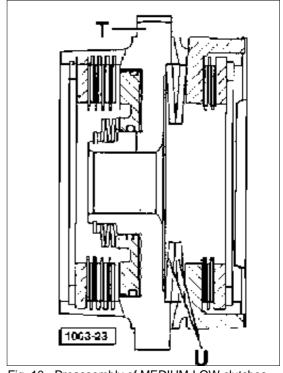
Preassembly of MEDIUM-LOW clutches MEDIUM-LOW.
